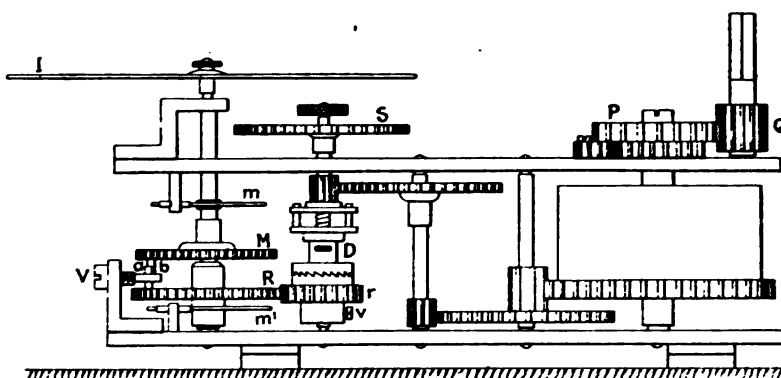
CLOCKWORK MECHANISM—SPEED AND DIRECTION INDICATOR
